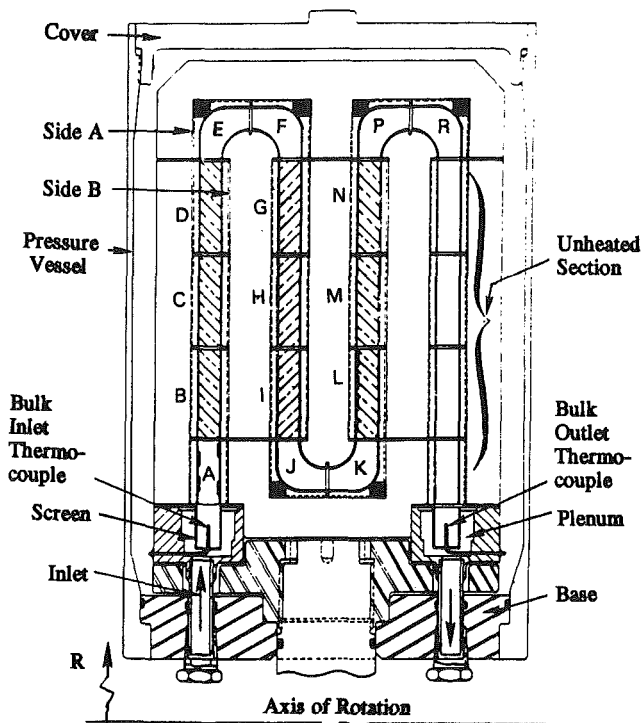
Cross-sectional view of coolant passage heat transfer model assembly with skewed trip rough walls; view through center of model toward leading surfaces with $\Omega > 0$, dotted ribs show locations on the trailing surfaces
